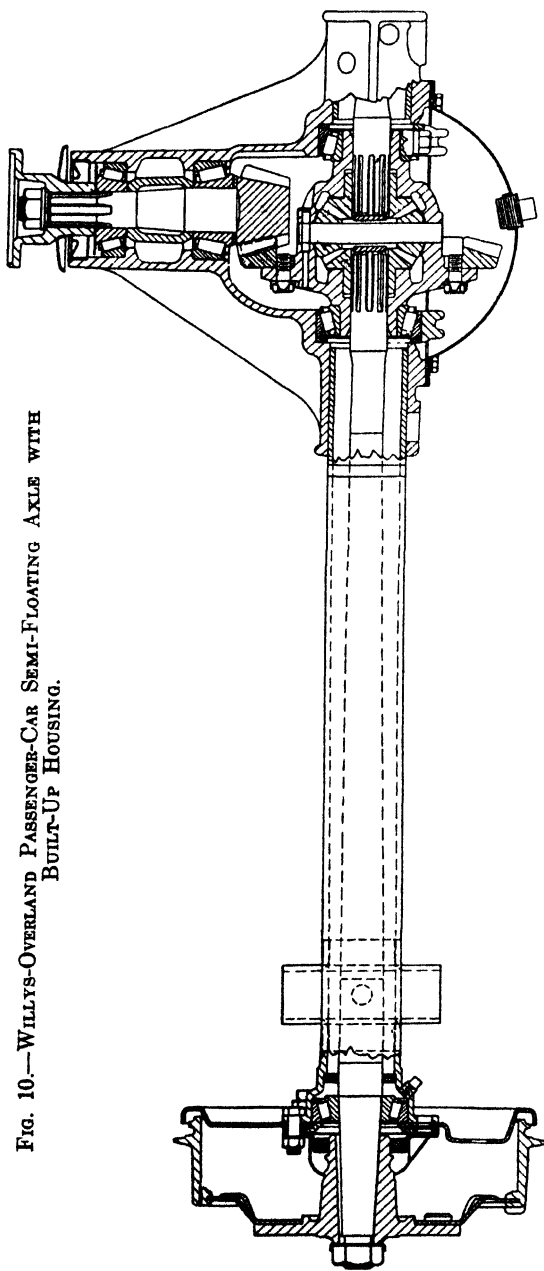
WILLYS-OVERLAND PASSENGER-CAR SEMI-FLOATING AXLE WITH BUILT-UP HOUSING.
